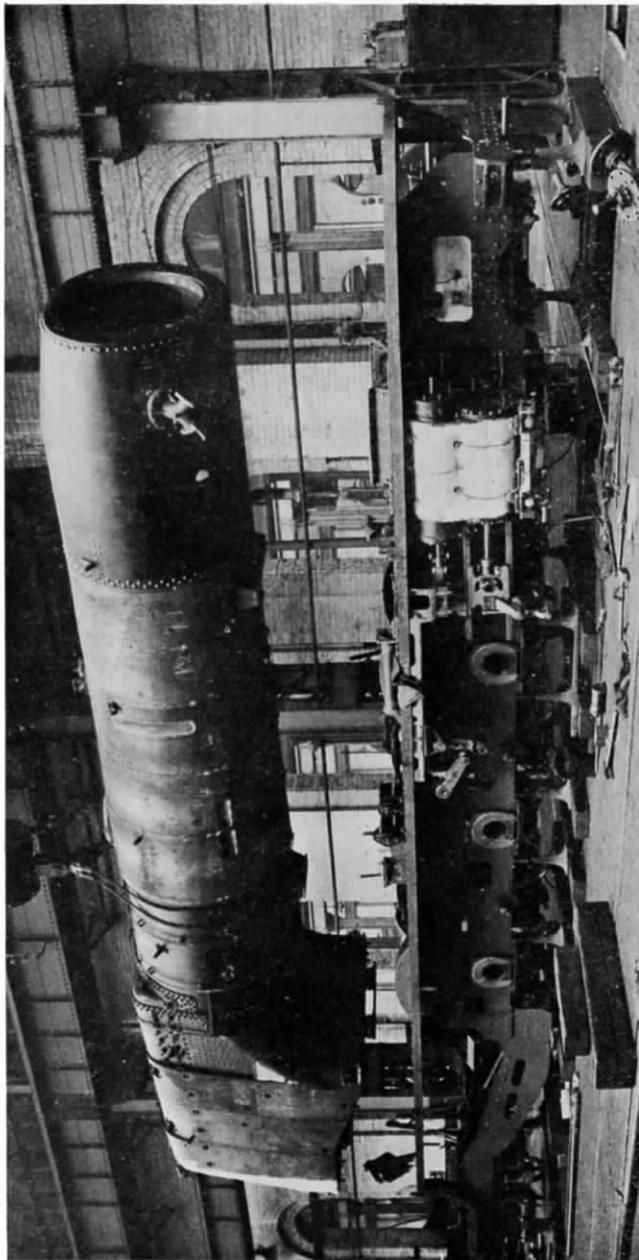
AN ERECTING SHOP OPERATION. BOILER OF 4-6-2 EXPRESS LOCOMOTIVE BEING LOWERED ON TO THE FRAMES IN CREWE WORKS, L.M.S.R.
